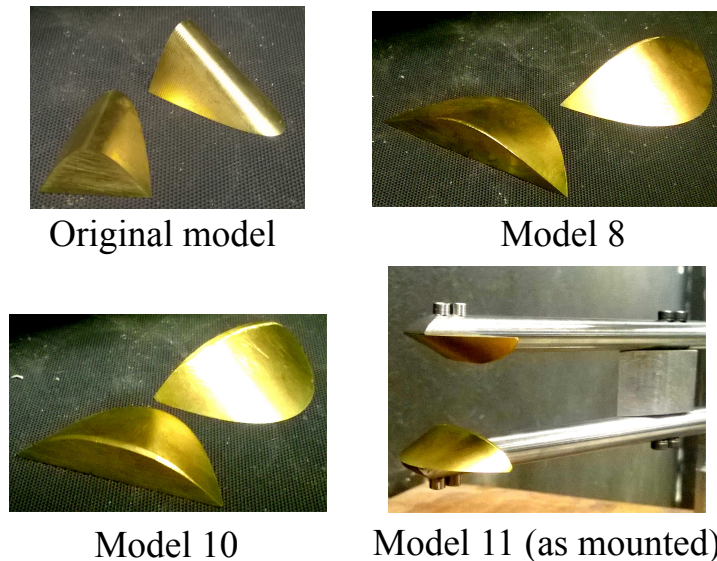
Photographs taken of test pieces after manufacture. Model 11 is shown as mounted on the sting assembly for placement in the wind tunnel test section.
